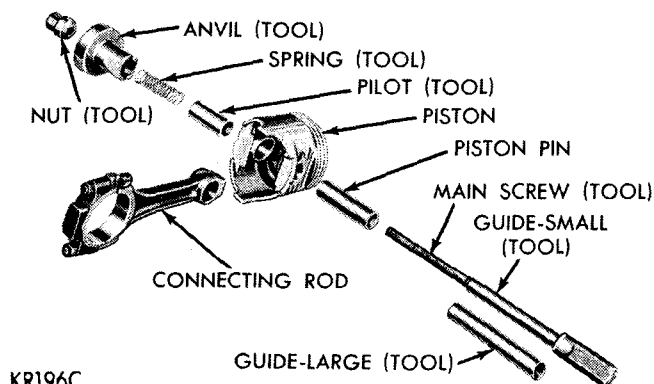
Arrangement of Tool C-4158 For Installing Piston Pin
